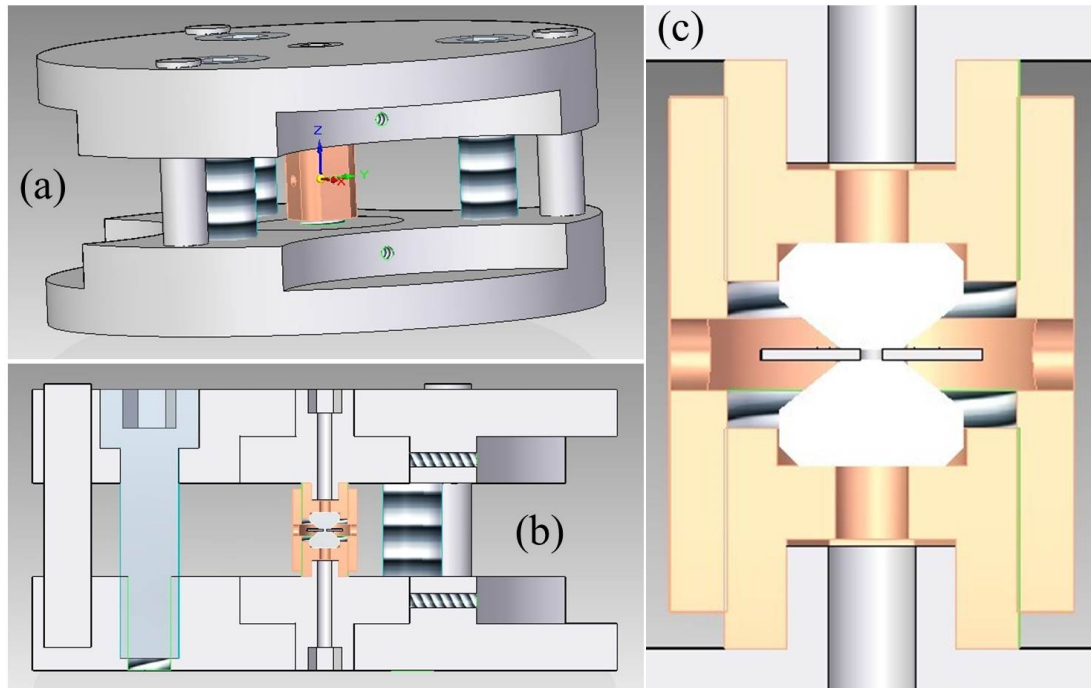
Virtual assemblies of the TM-3He-DAC and the accessory screws-clamp, (a) overall view, (b) section view, (c) enlarged-section view of the cell.
